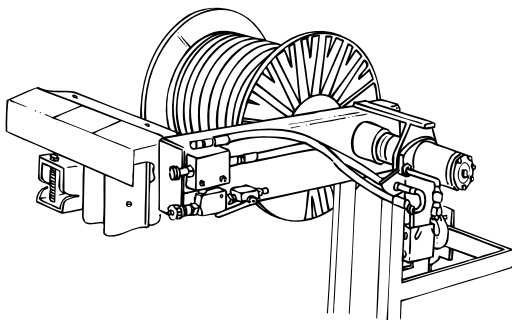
Retrieval Head (Courtesy of Andros Engineering)
